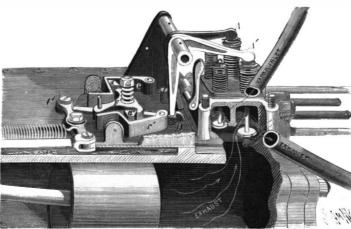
VALVE MOTION OF MOTOR CYCLE.
